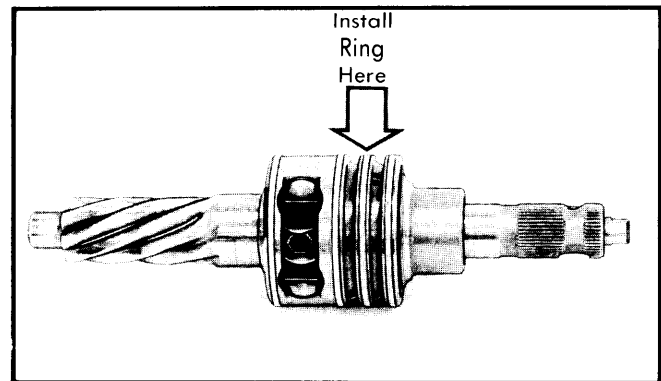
Installing Green Teflon Ring to Pinion. Ring Must Be Installed at Arrow.
